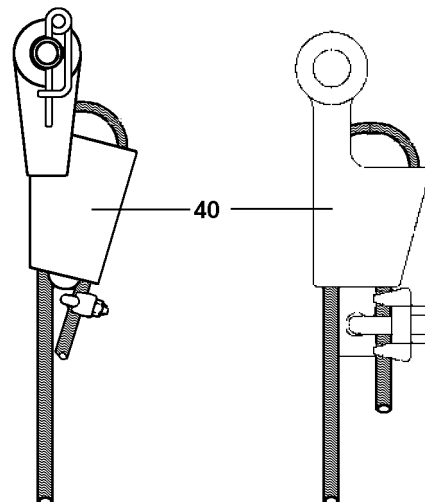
Rope end connection without locking clamp or locking cast sleeve
